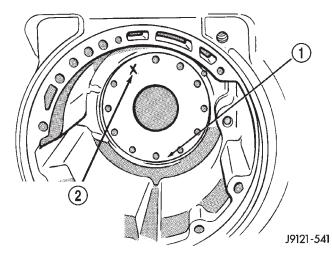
Location Of Blank Area In Clutch Cam Bolt Circle
